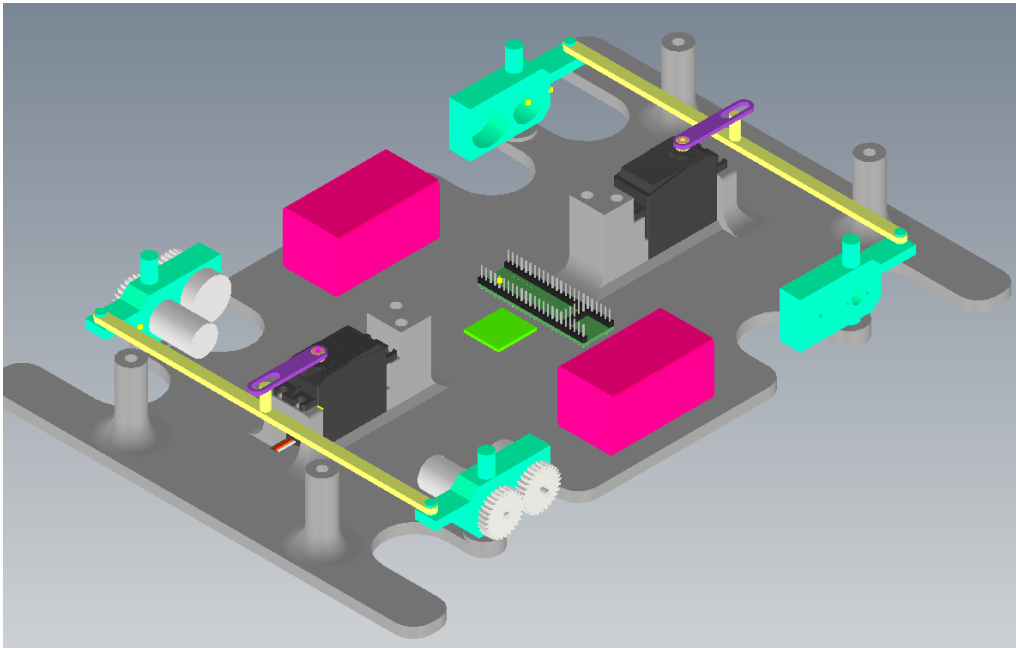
Final physical vehicle design with one steering servo per axle and two-wheel drive. Note that the prototype slightly deviates from the CAD model.
